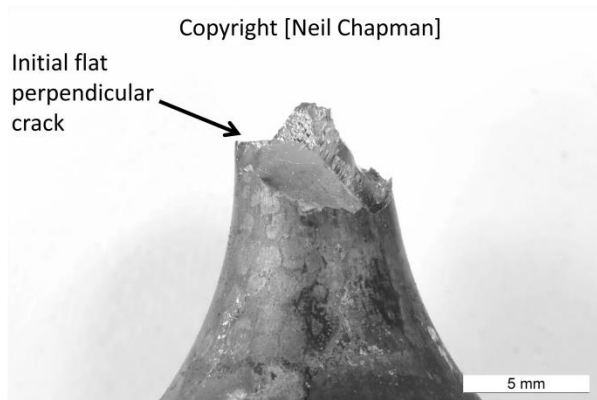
Low powered optical microscope image of fractured test specimen showing deviation from the typical 55° crack/fracture angle produced from corrosion fatigue testing using the 10-1-1-1 s waveform and non-precorroded test specimen
